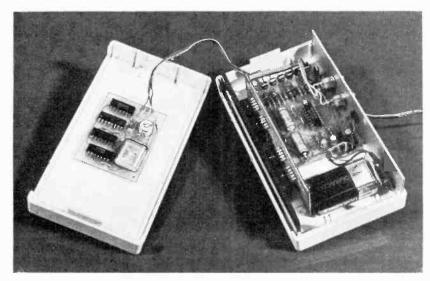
Interior view photograph presenting the general layout of the three boards, switches, wiring and back-up battery.
